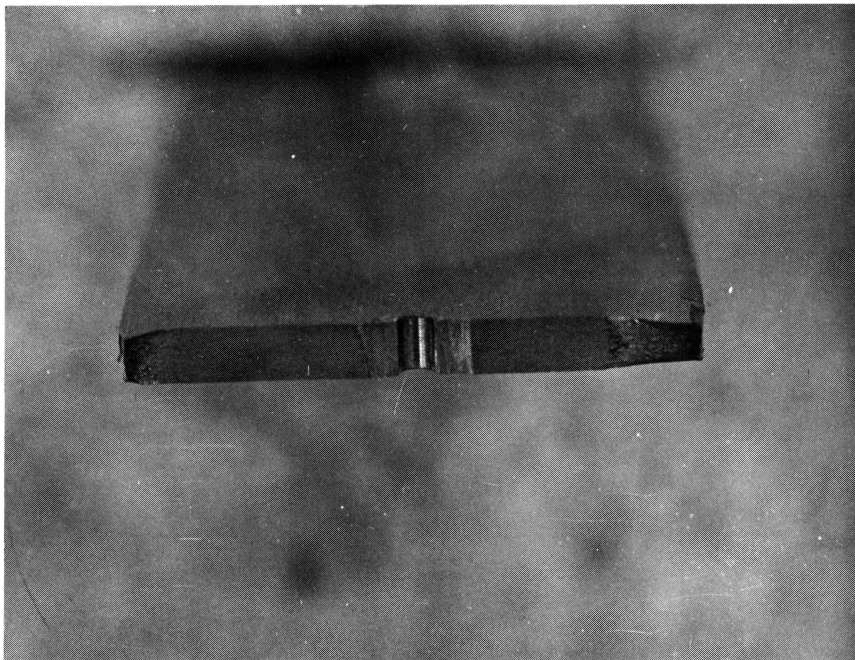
Fracture surface of as received crack growth specimen 5-46.
